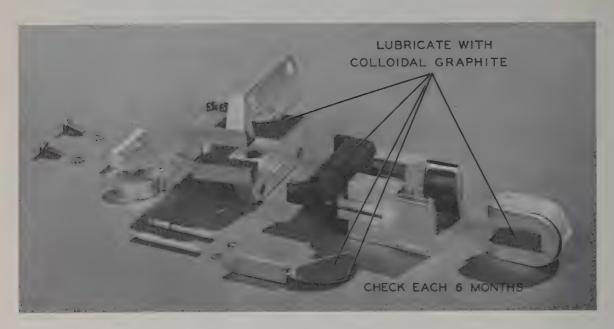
Lubrication of PA Plate Tank Sliding Contact Assembly.
